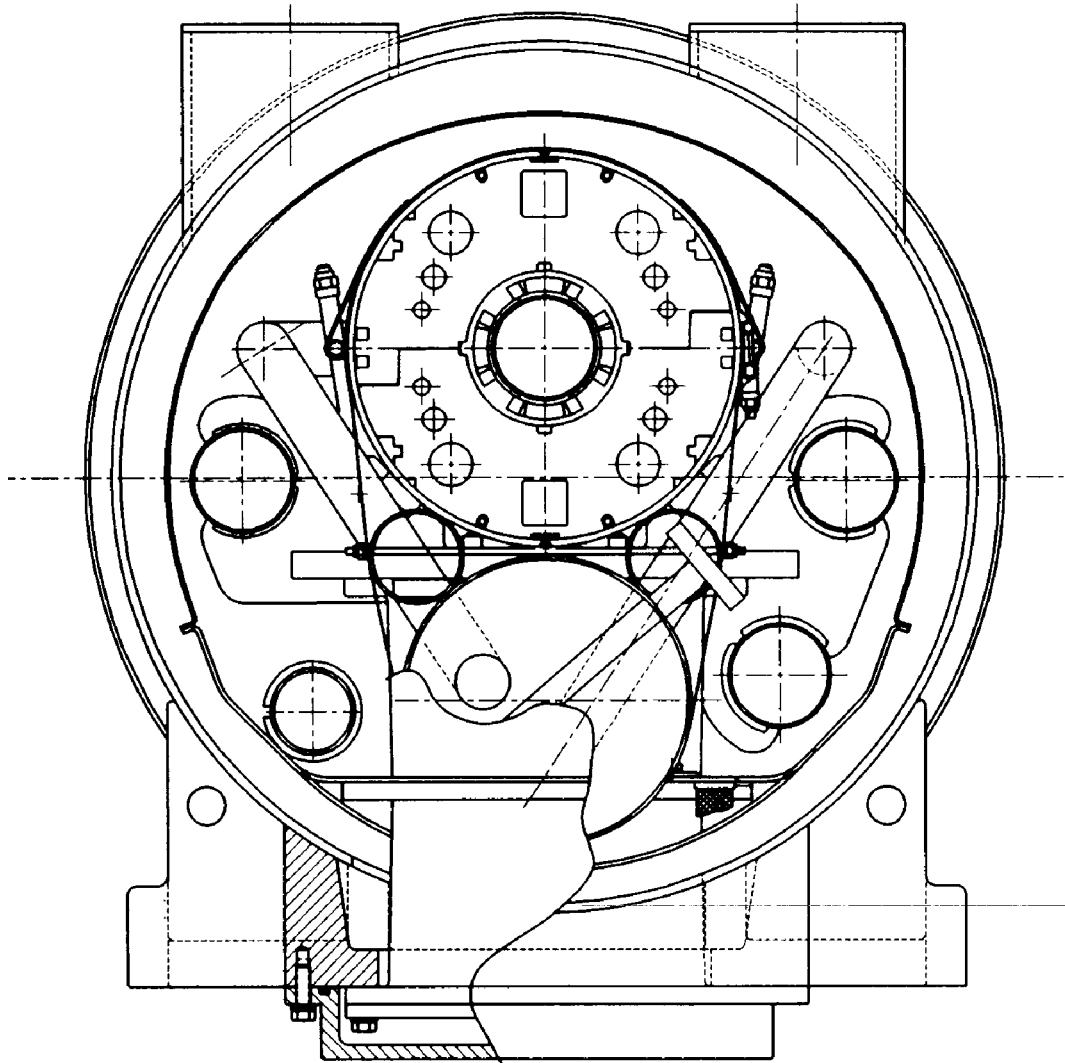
Quadrupole cryostat cross-section, showing recooling.
